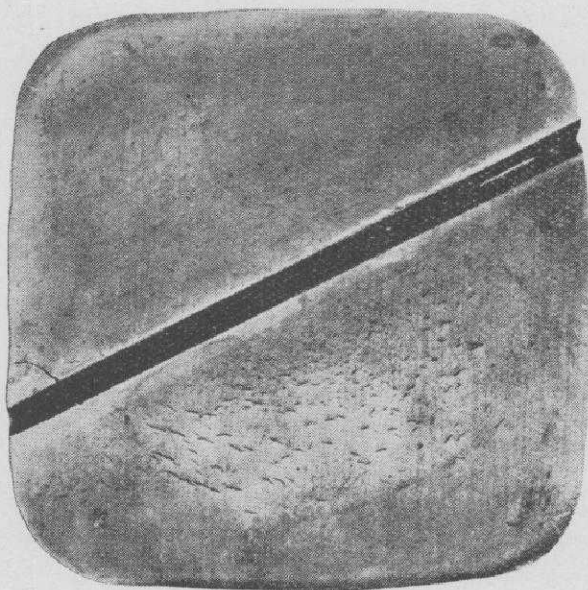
SECTION OF A 5 IN. BILLET IN 3 PER CENT NICKEL STEEL, SHOWING HAIRLINE CRACKS. THE BILLET HAS BEEN NICKED AND FRACTURED ON A DIAGONAL LINE; *see* FIG. 20
